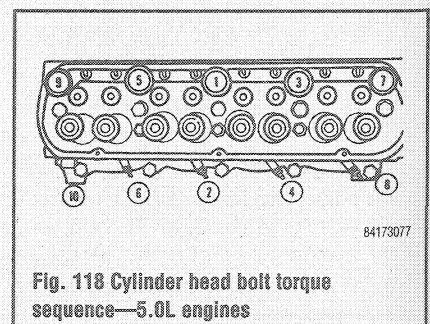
Cylinder head bolt torque sequence—5.0L engines
